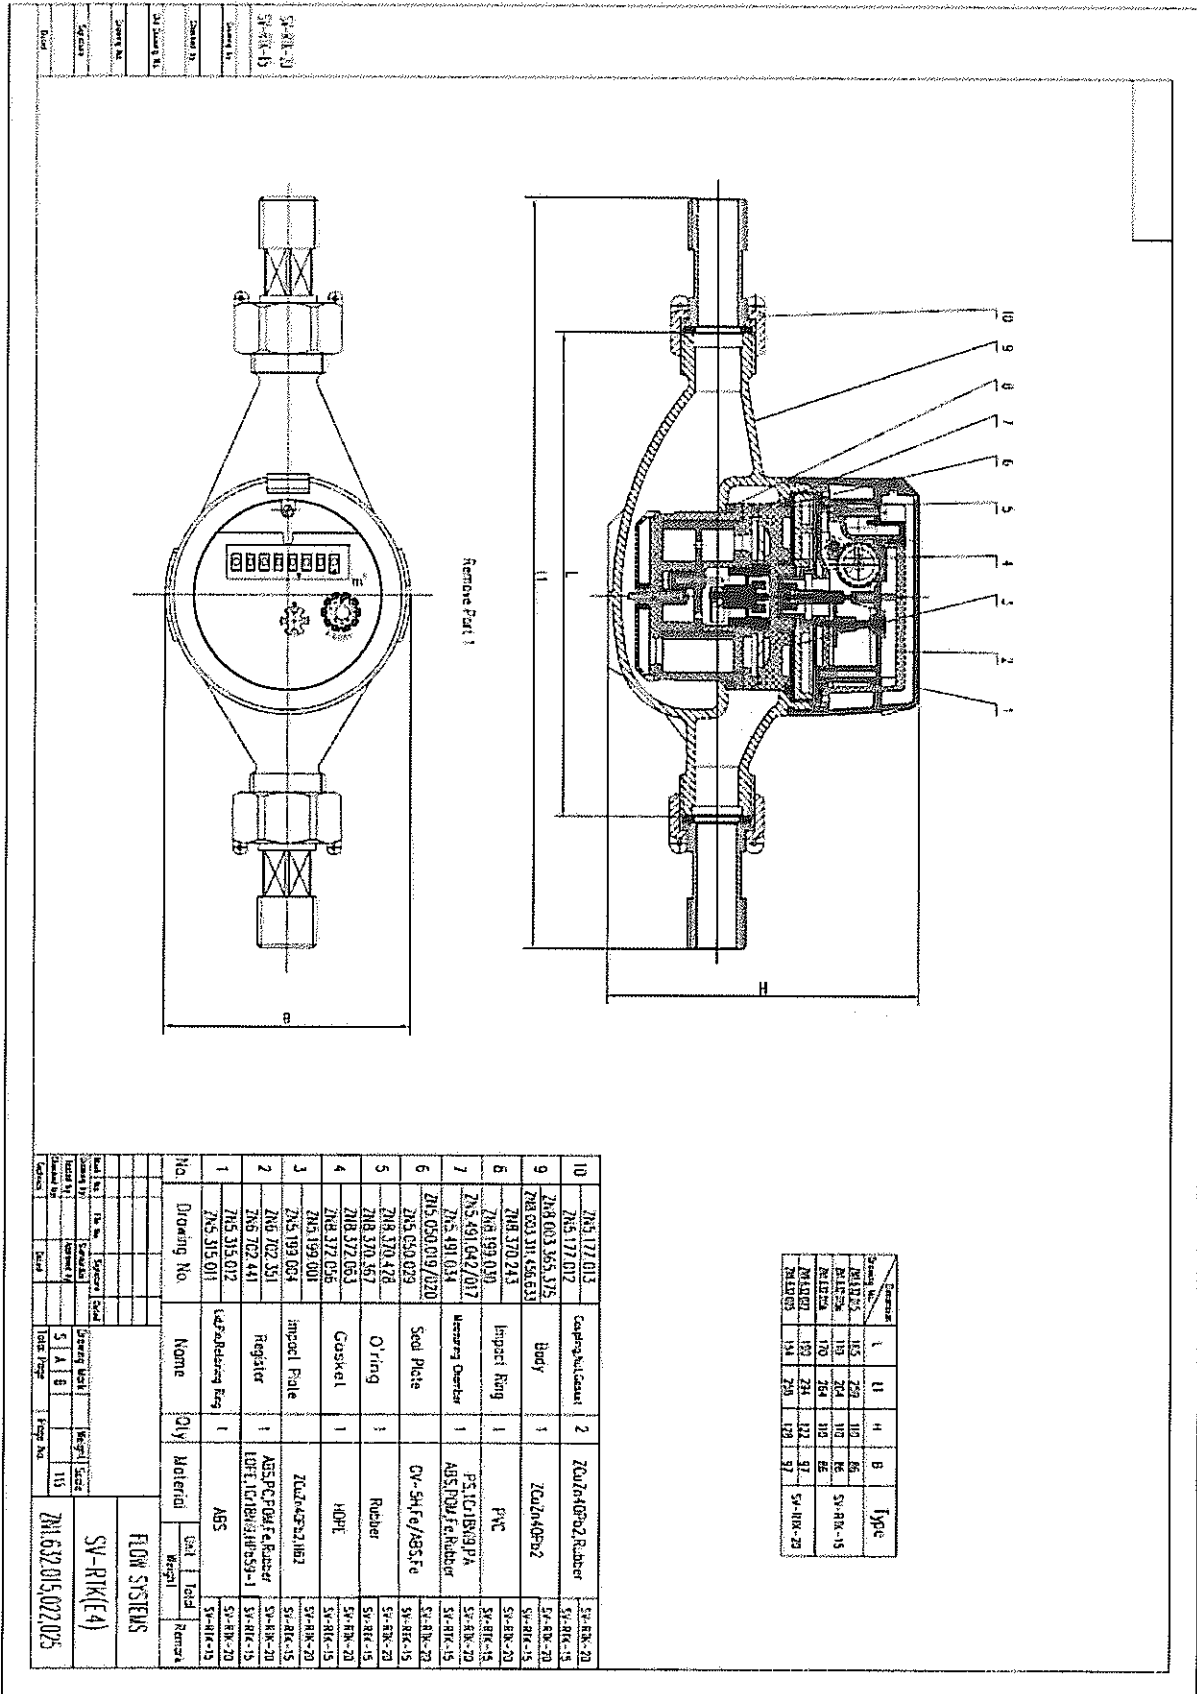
The water meter type SV-RTK (E6) assembly drawings:
